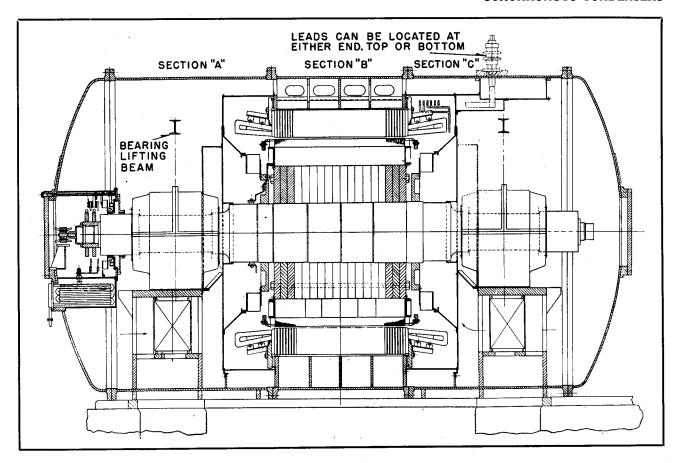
Cross Section View of a Typical Condenser With Removable End Domes
